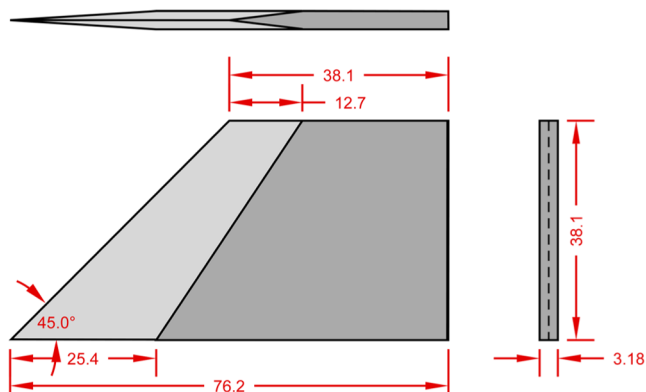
Sketch of the fin geometry. Dimensions in millimeters.
